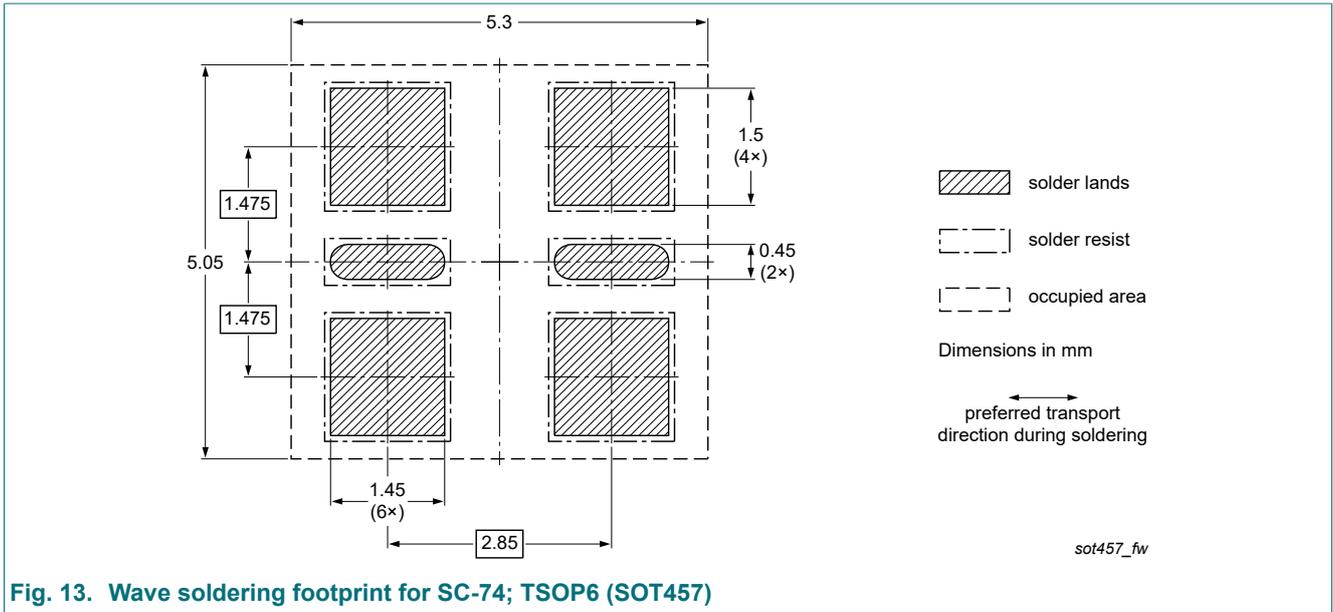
Wave soldering footprint for SC-74; TSOP6 (SOT457)
